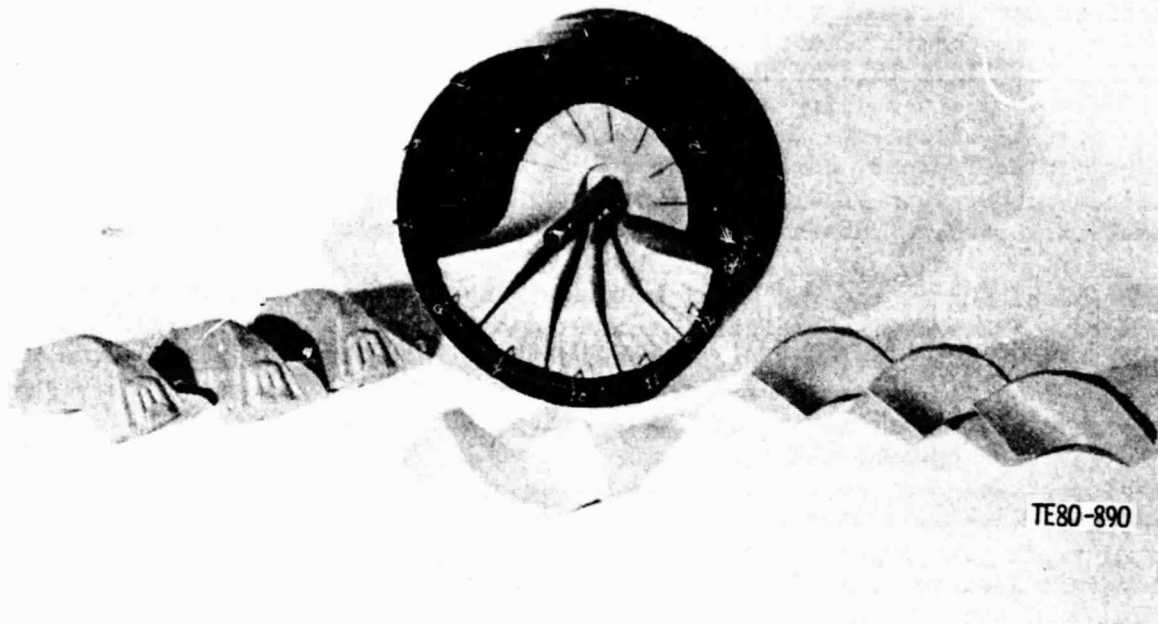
Disassembled Gasifier Turbine Wheel Mold.
